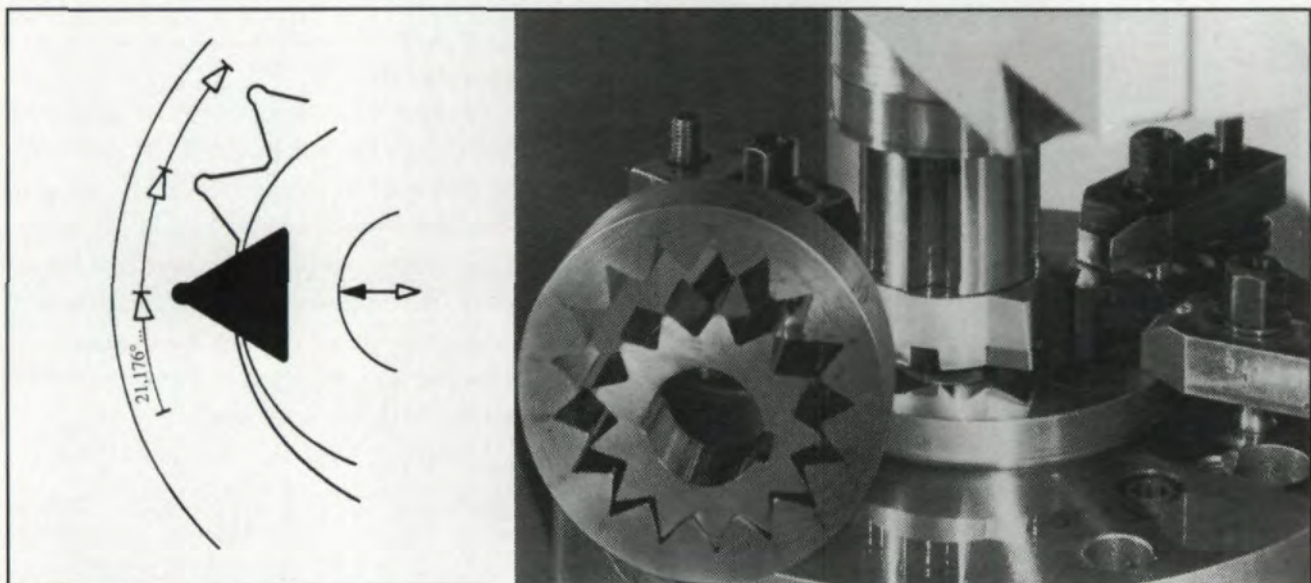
Preshaping the special internal profile of an oil pump gear by the single indexing method.
